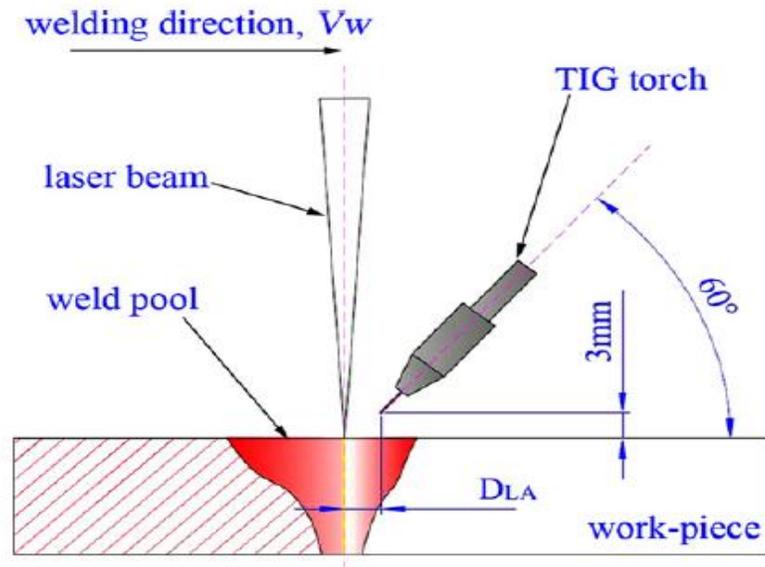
Schematic setup of CO₂ laser-TIG hybrid welding [131]
